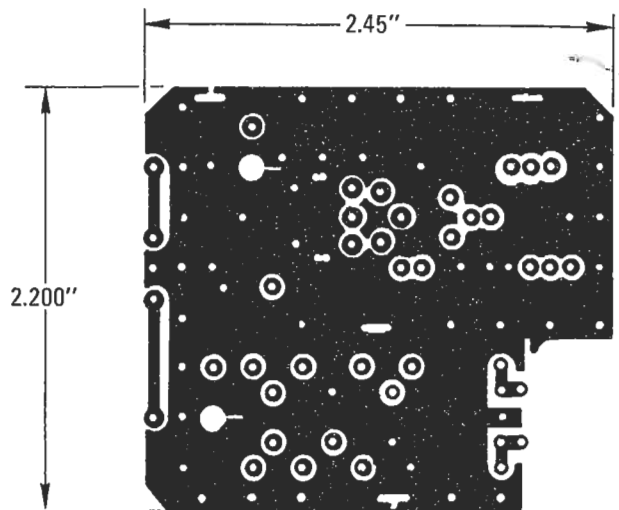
FOIL PATTERN of bottom side of double-sided main board shown actual size.
